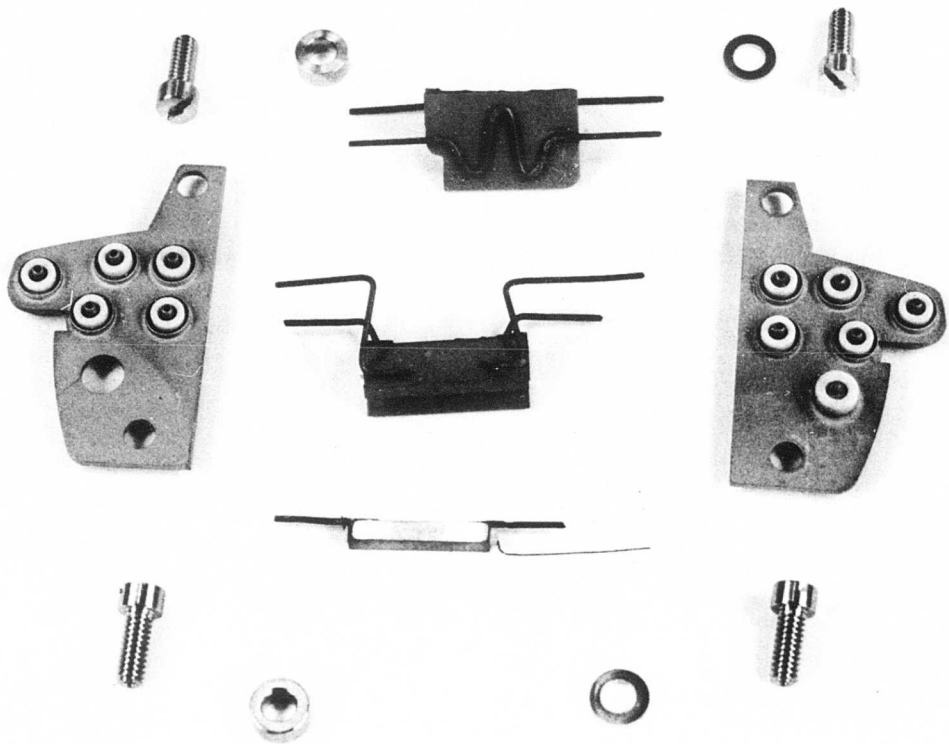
GUN ASSEMBLY COMPONENTS - QKA851
